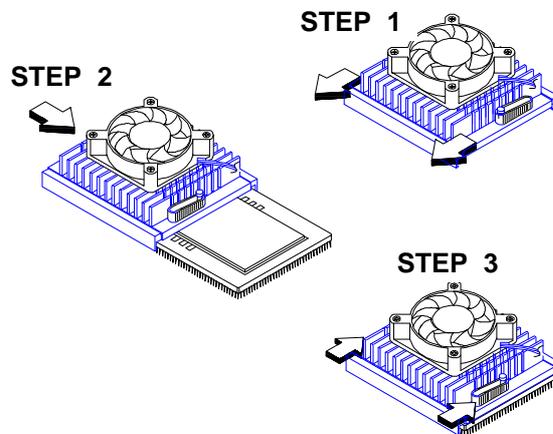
Attaching the Sliding Heat Sink to the CPU
